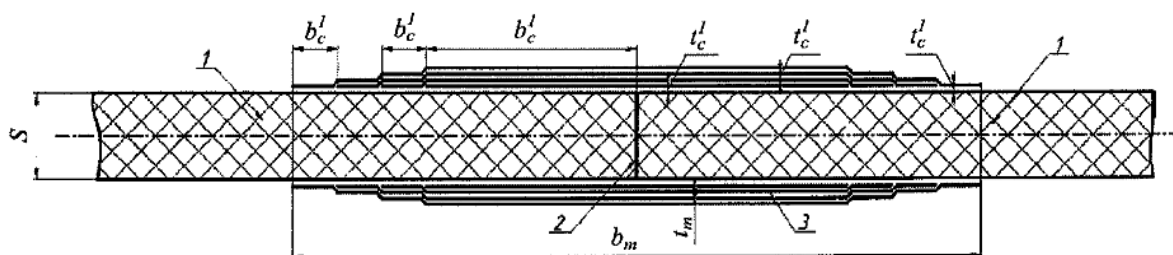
Structural scheme of a moulded butt (seam) joint of single-skin members without edge preparation:
